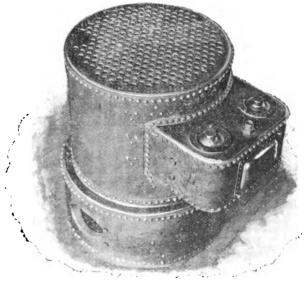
Whitney's Boiler. 14 in. Diameter and Containing about 300 Copper Tubes \(\frac{1}{2} \) in. Diameter, 13 in. Long; Shell \(\frac{1}{10} \)-in. Thick Steel Plate; Tested to 500 lb. Hydraulic Pressure.
